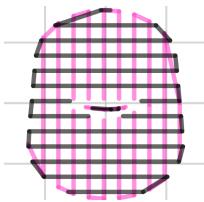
Support infill pattern : Rectilinear Grid
